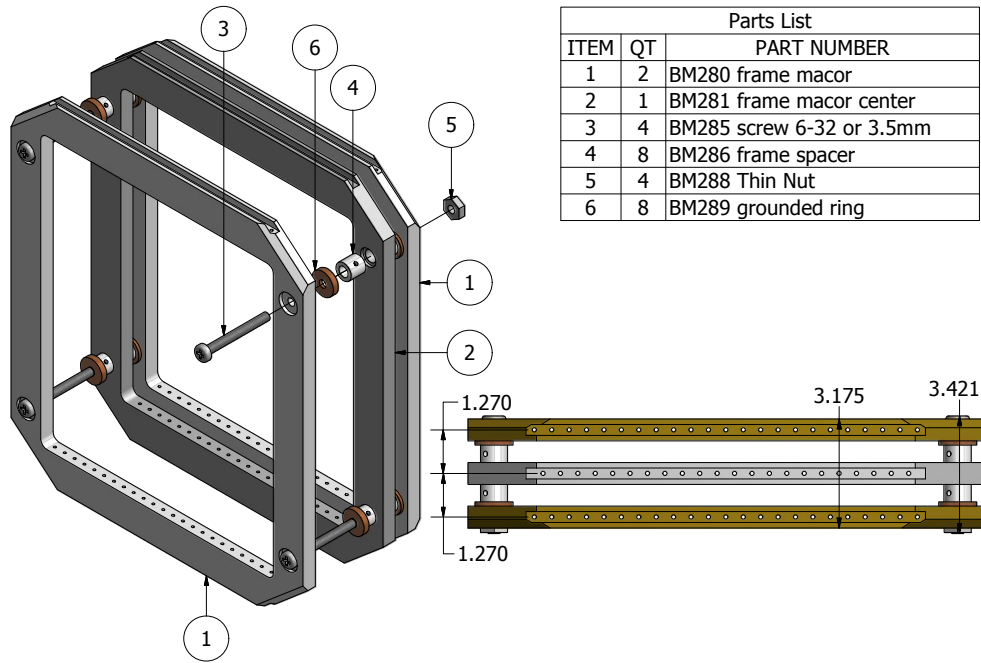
Exploded CAD drawing of the frame assembly for the new frame stack design that was used in the beam monitors. Linear dimensions are in centimeters.
